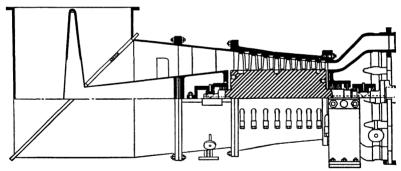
Cross section of Westinghouse gas turbine for 2,000-hp plant. Inlet at the right; eight-stage turbine, exhaust diffuser, exhaust hood at the left.
